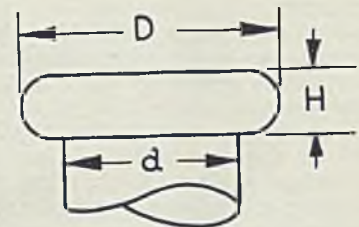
Dimensions recommended for flat head to be driven on cold rivets. Here diameter of head D is 1.5 rivet diameter d . Minimum height H is 0.25 rivet diameter d
